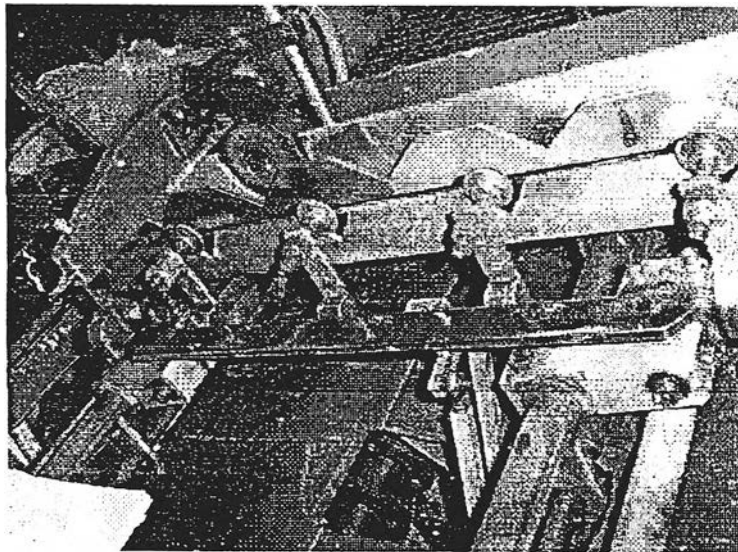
Picture of flame treatment system in silk screen printing machine
